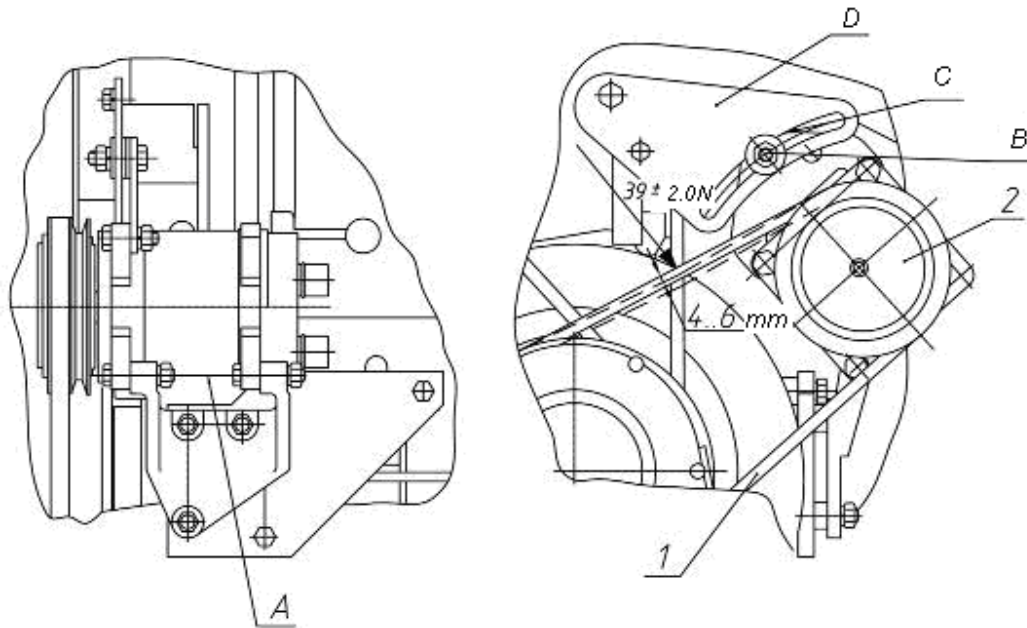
Check and adjustment of tension of the belt of air conditioner compressor drive of diesel Deutz.
